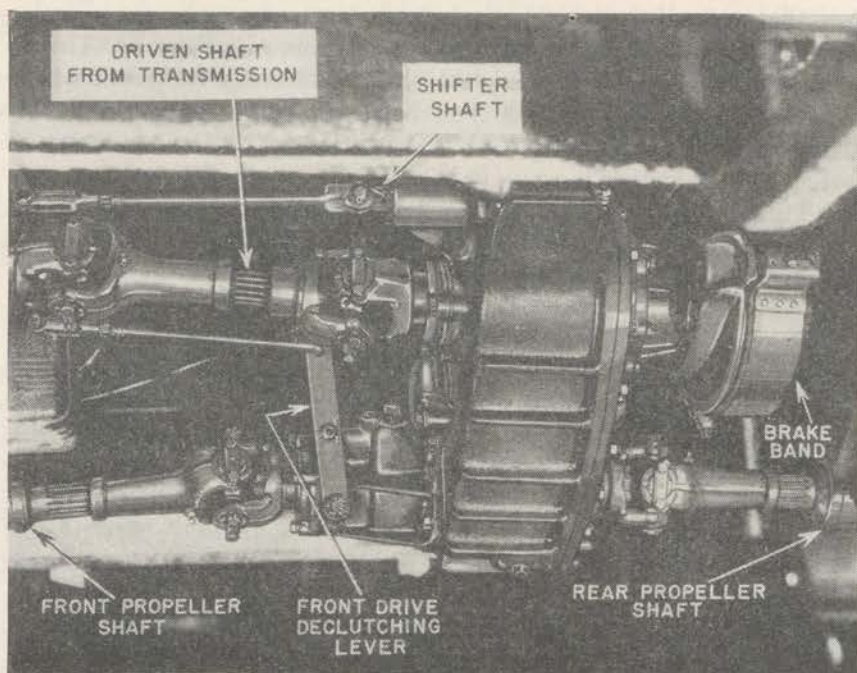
Transfer case installed in a four-wheel drive truck.
